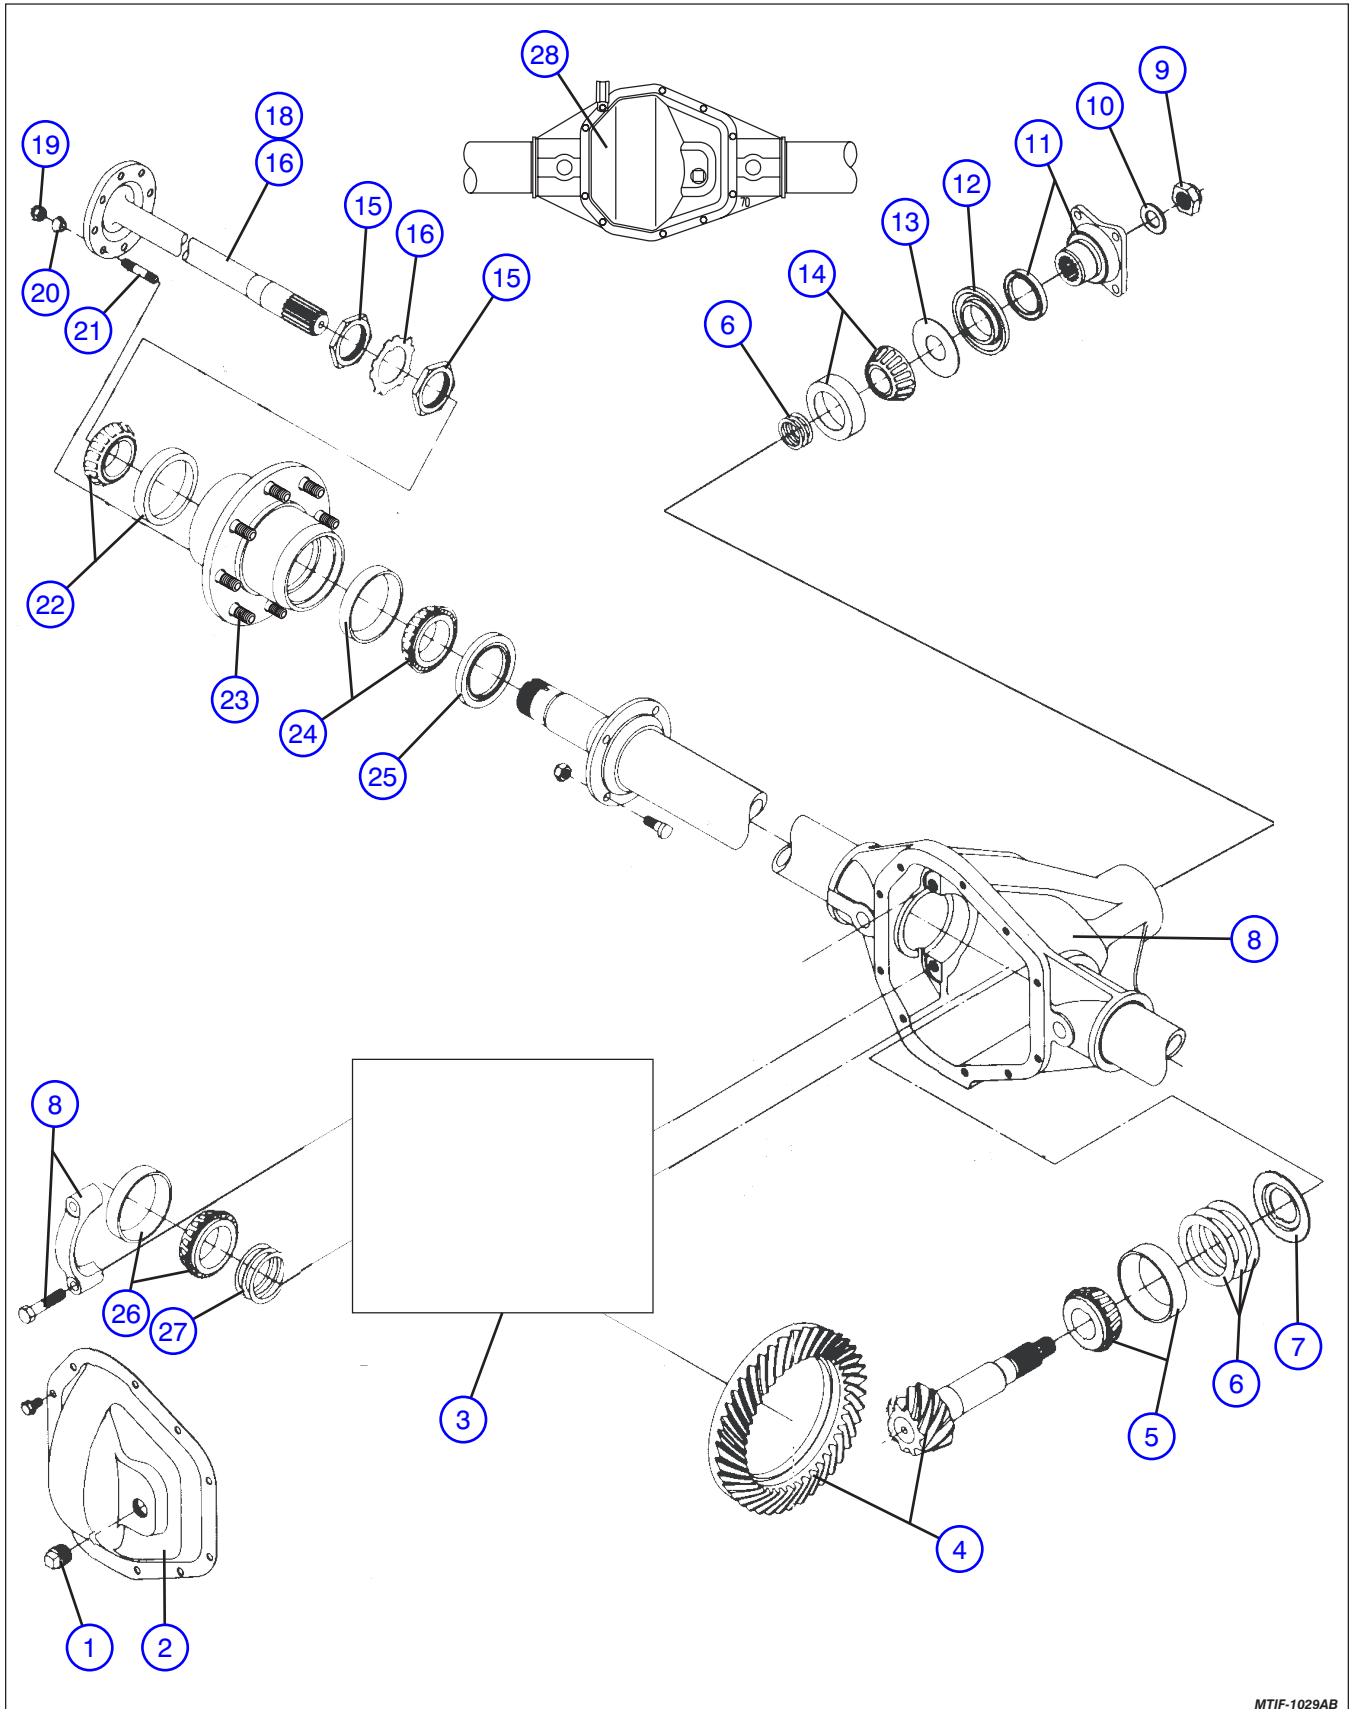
Front Drive Axle Assembly (4-wheel Drive Machines)
